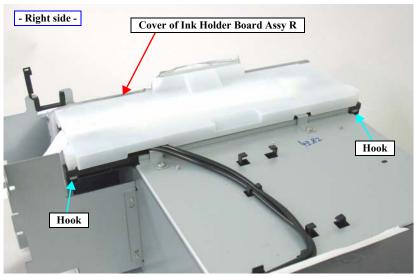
Removing the cover of the Ink Holder Board Assy R
